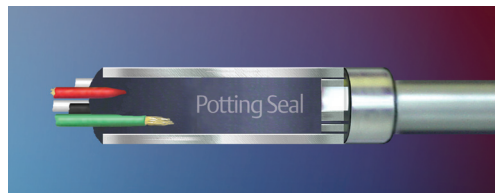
Potting Seal of Rear Sensor Housing
